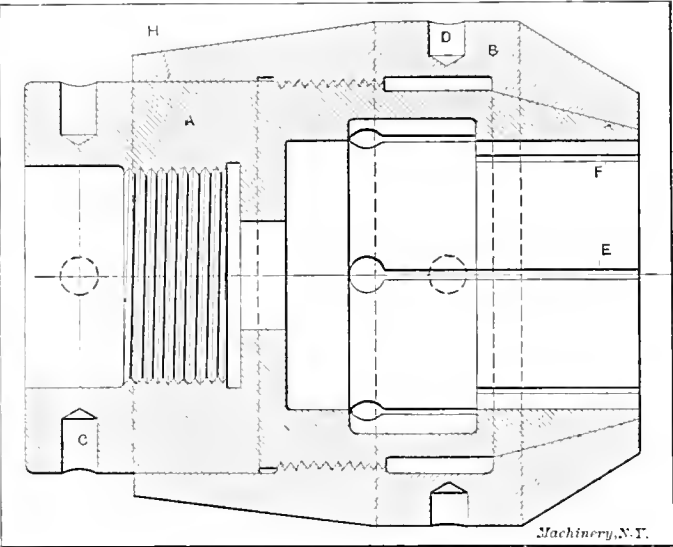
Chuck for Holding Pistons while Boring Mouth
